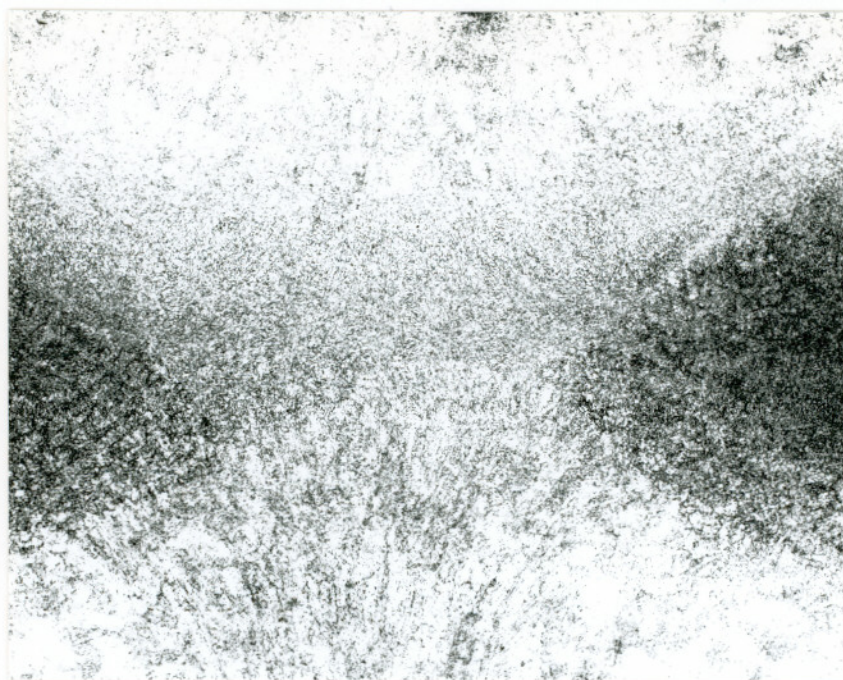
Optical macrograph of the GTA weld metal of Alloy 7 deposited at 3.5 kJ/mm (90 kJ/in.) heat input on matching base plate with Ar-5%CO₂ shielding gas, showing the region reheated above Ar₃.
